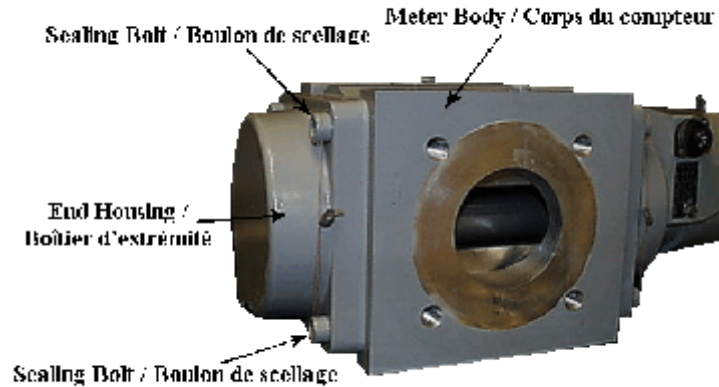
Sealing the end cover containing the timing gears / Scellage du couvercle d'extrémité qui abrite les engrenages de distribution
